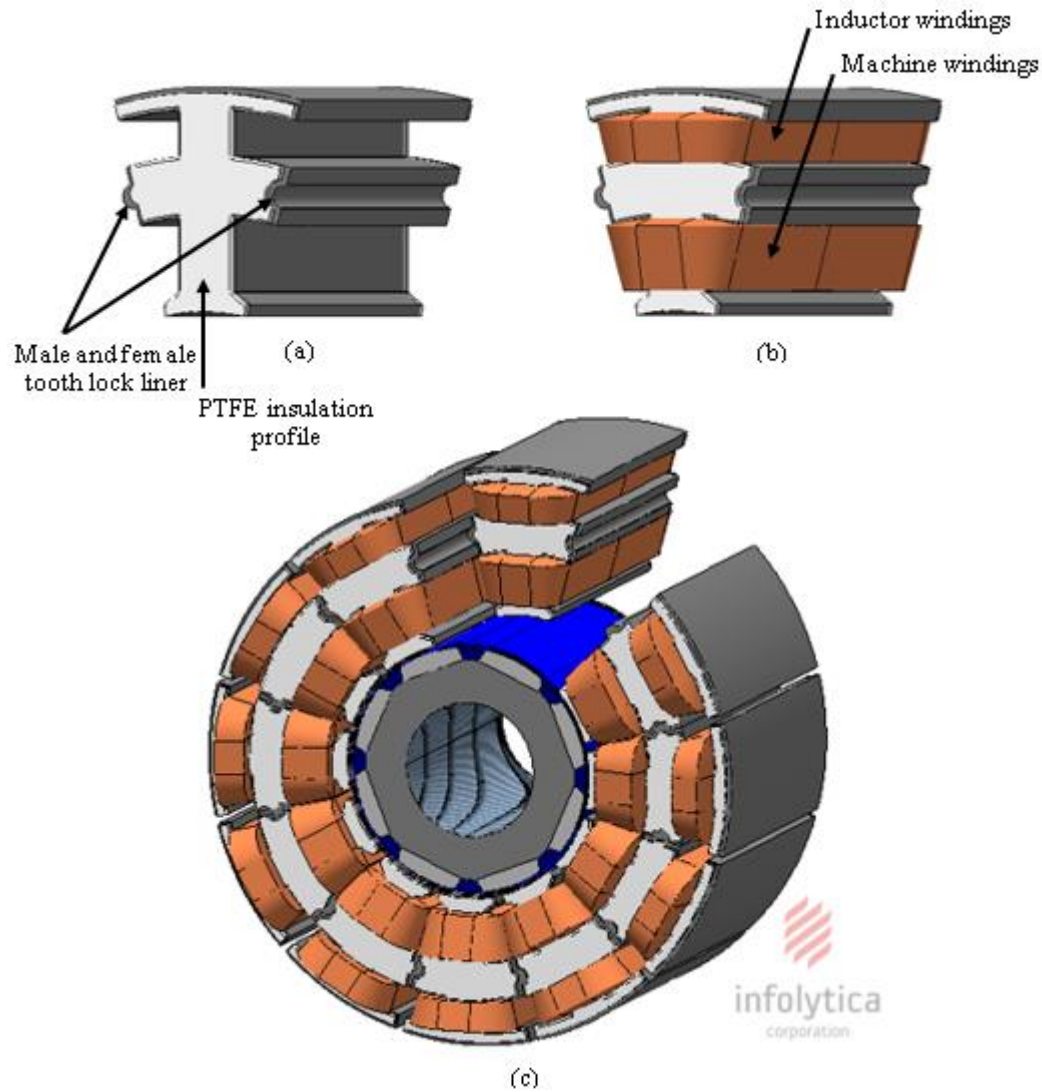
Magnetic cross-coupling between integrated filter inductors and the HSHP machine
